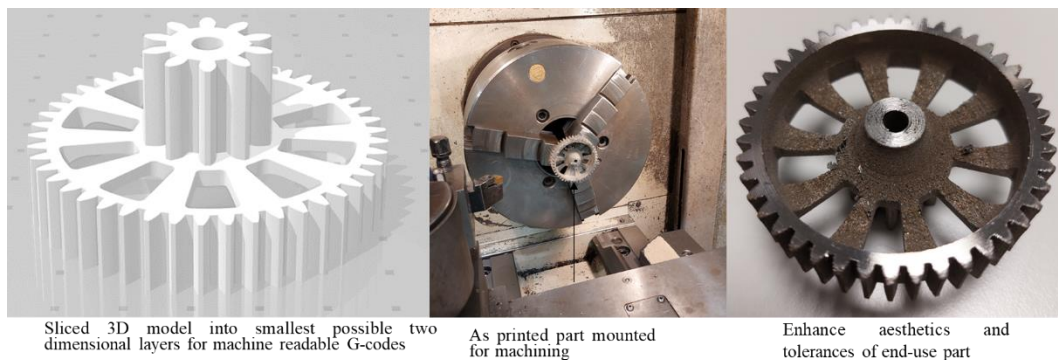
Representation of sliced 2D layers, as printed and machined images of gear.
